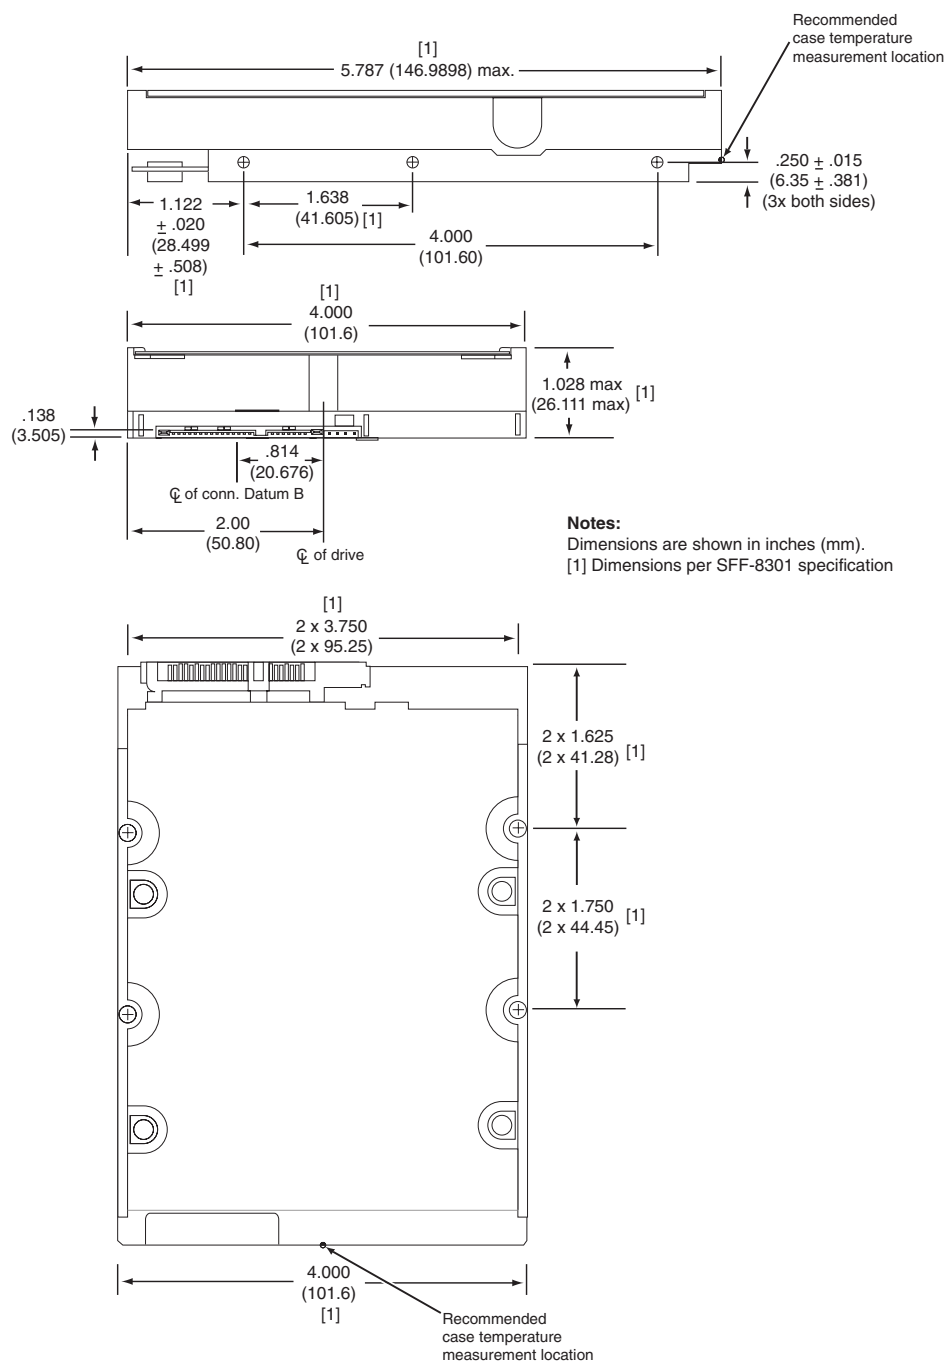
Mounting dimensions for 750-200 GB models (except ST3250410AS and ST3250310AS)
